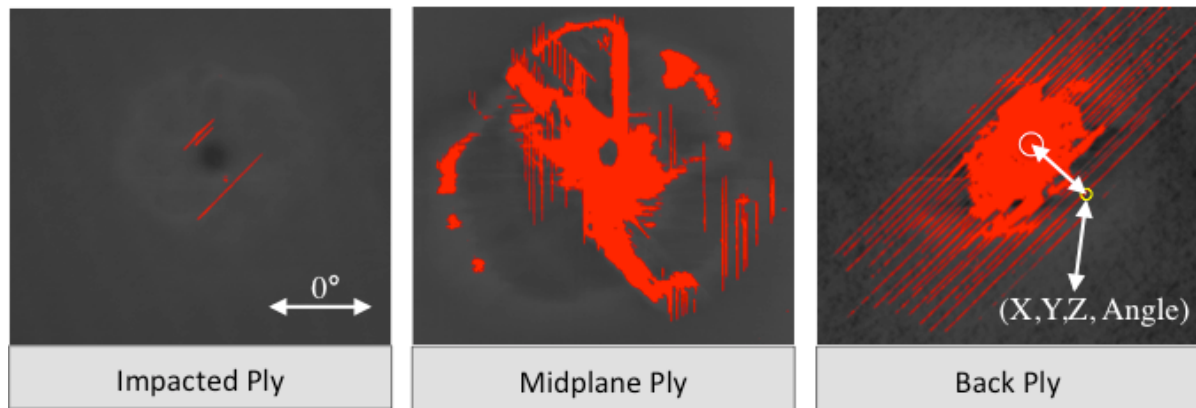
Crack identification using X-ray CT for thick composite plates
